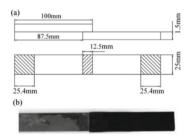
The samples and dimensions for peeling test: (a) samples' dimensions, (b) the sample.
